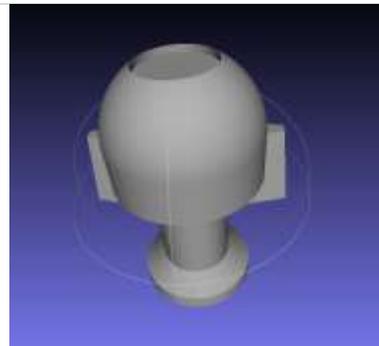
An design for the eye target blank which fits inside the face mount shown in Figure 2. The piezography printed pattern and cornea simulation solutions fits inside the front facing indentation in the design. The reflective properties of the 3D printed model is similar to that of the human sclera as seen in near-infrared wavelengths.
